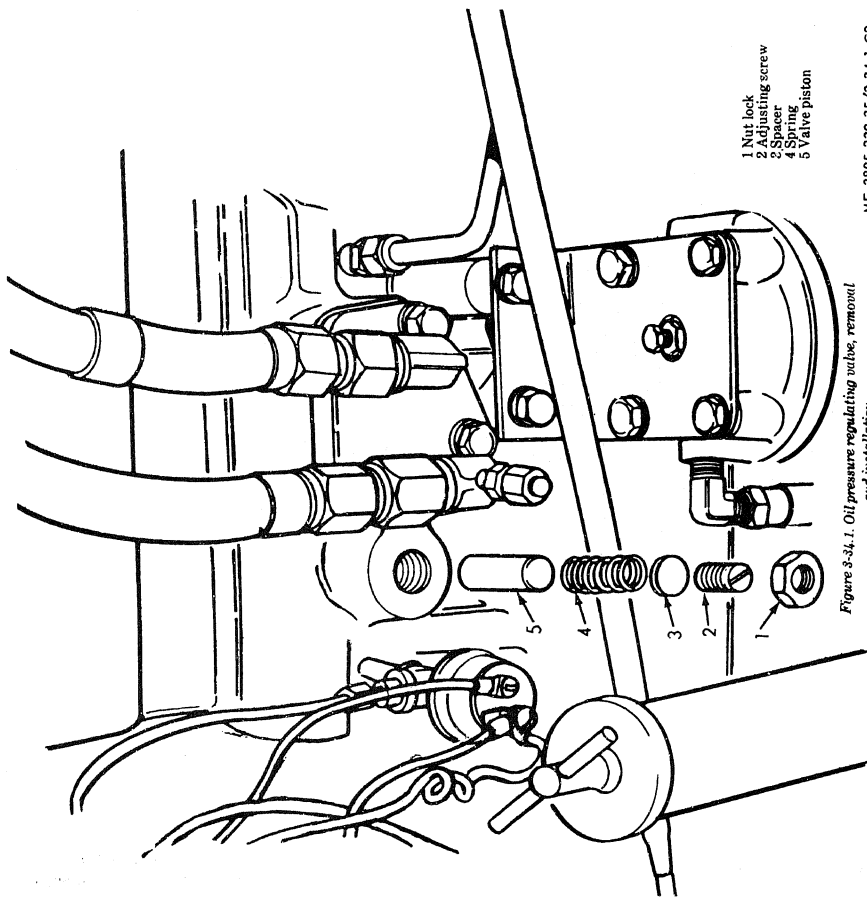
1. Oil pressure regulating valve, removal and installation.
